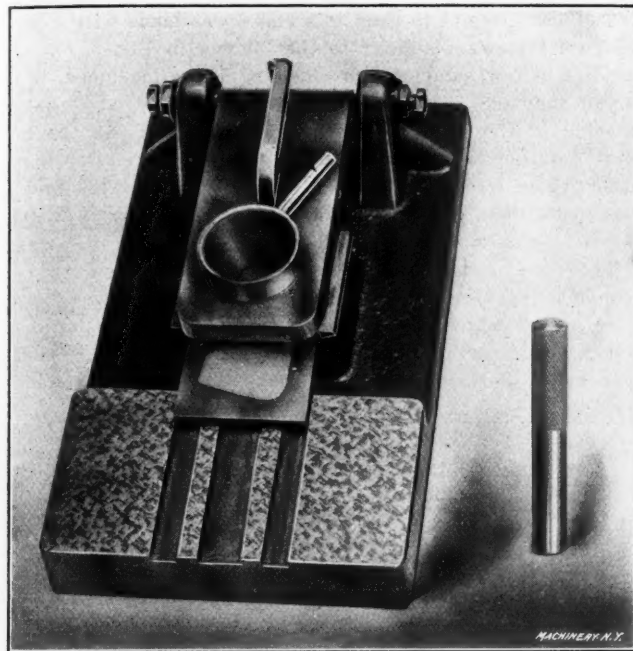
Jig for Molding Wax Formers for Engraving Pearl Handles
